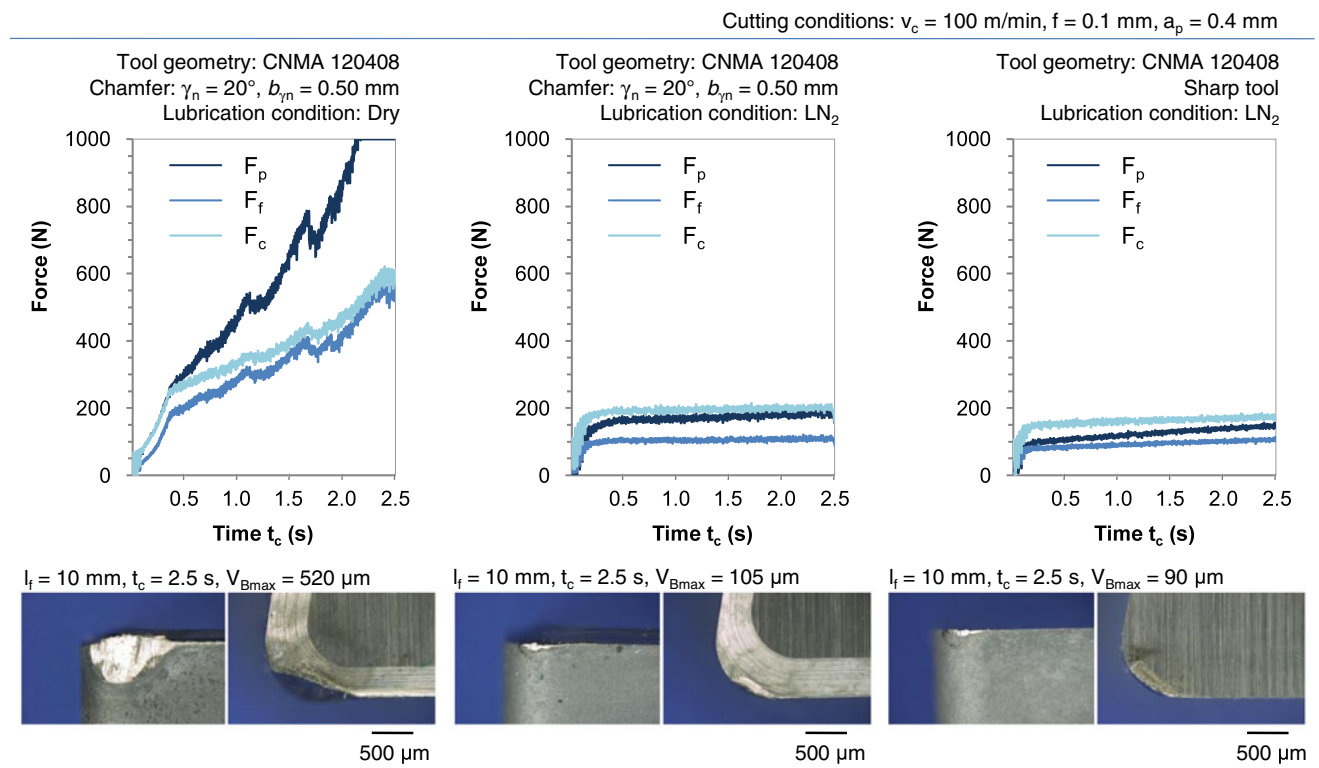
Cutting force measurements and tool wear with the CNMA inserts referring to dry and cryogenic (LN₂) lubrication conditions
